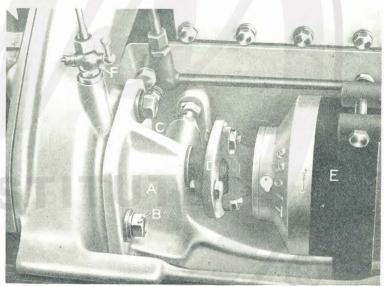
THE DYNAMO AND CAMSHAFT DRIVING CHAIN ADJUSTMENT OF THE 14 H.P. "STANDARD."
